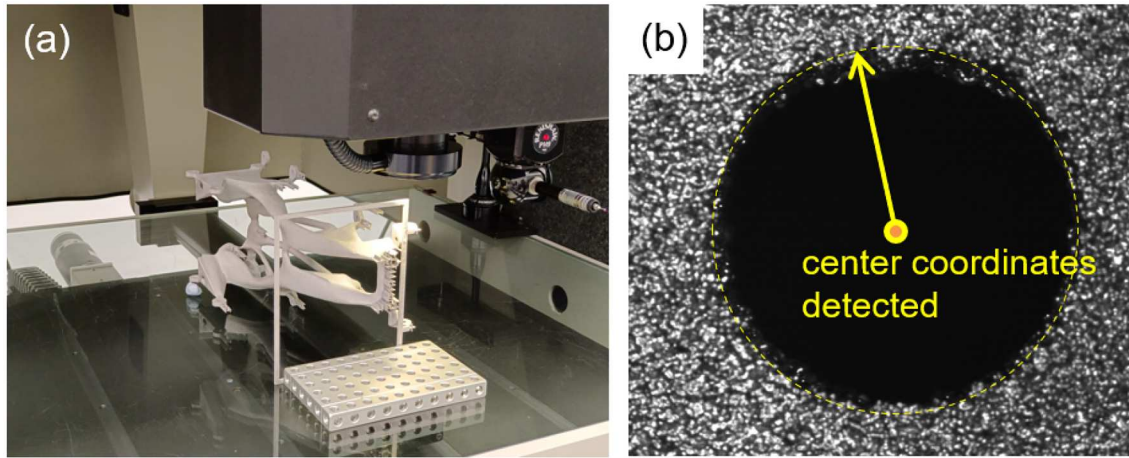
(a) Dimensional measurement in the scanning mode with CMM and (b) the fitting method for pilot-hole measuring marks.
